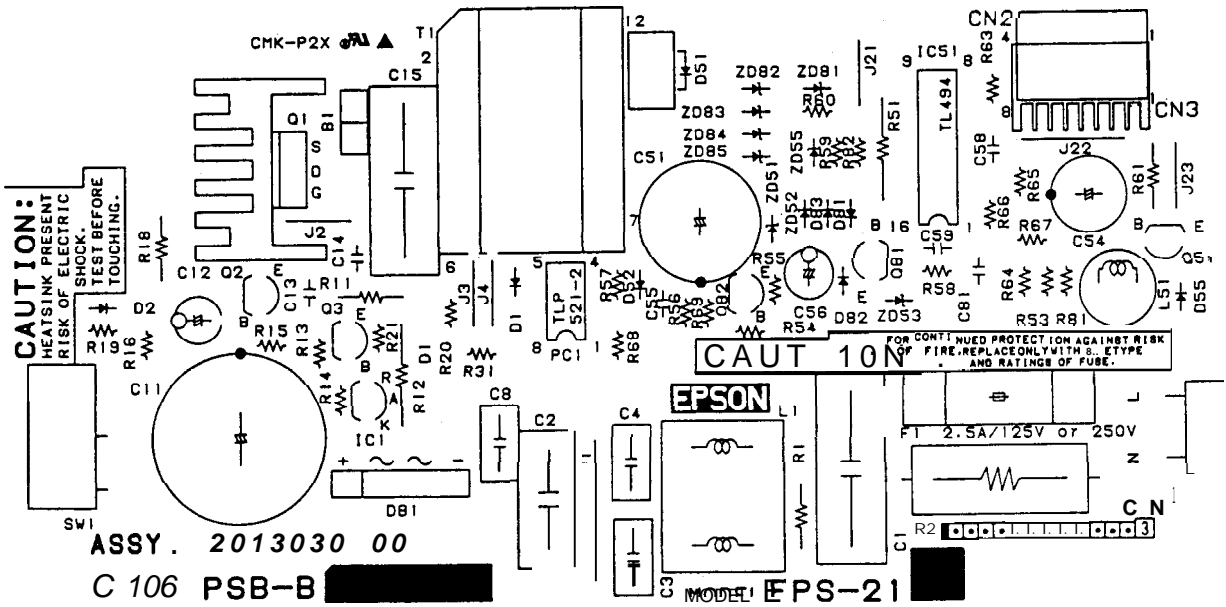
'. CI06 PSB-B/PSE-B Power Supply Board Component Layout
